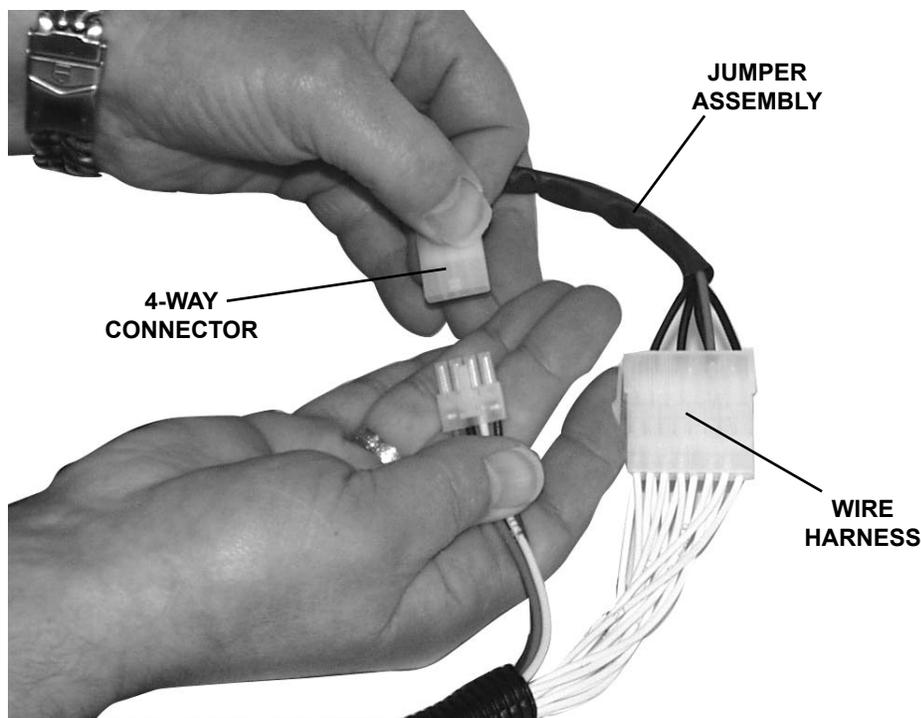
Attach the Jumper Assembly to the Wire Harness.
